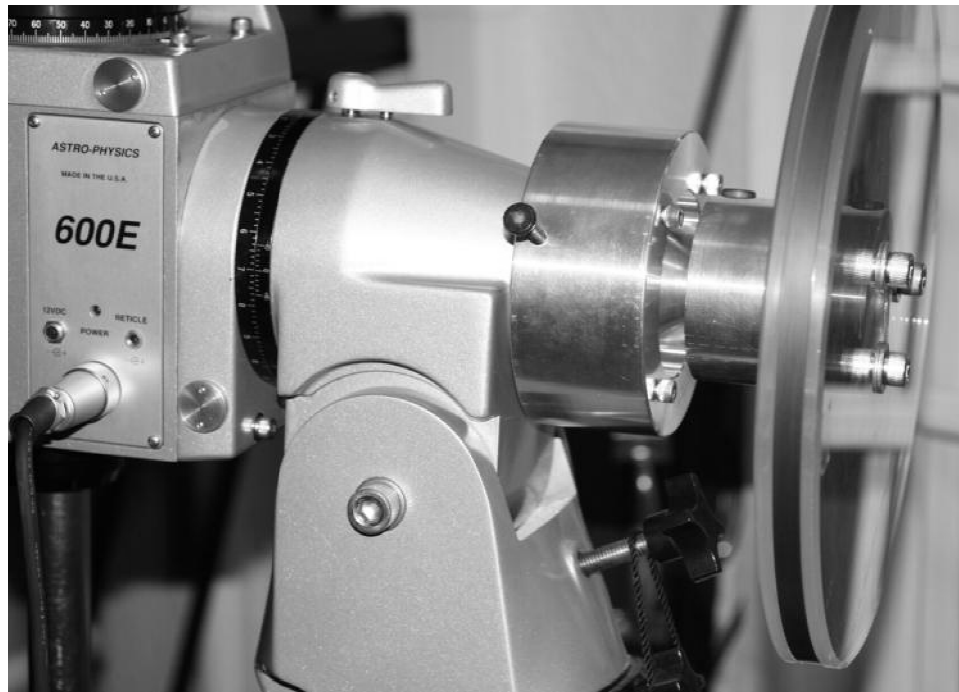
Right Ascension shaft coupling, encoder read head mounting flange, and acrylic encoder disk with Bogen magnetic tape affixed to groove in encoder disk
